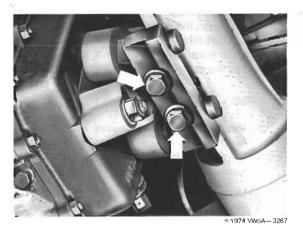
Bolts (arrows) that hold the limiting stop.
